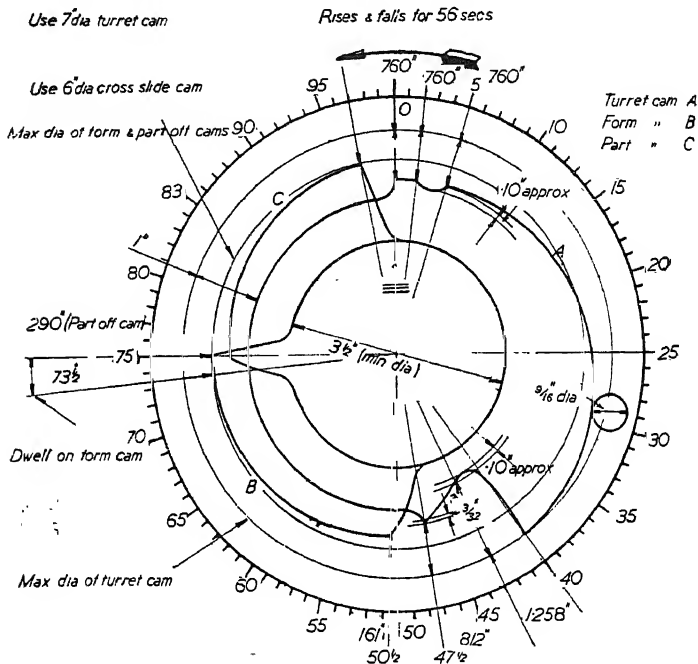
Tool layout for component shown on page 440. (See table and illustration.)
